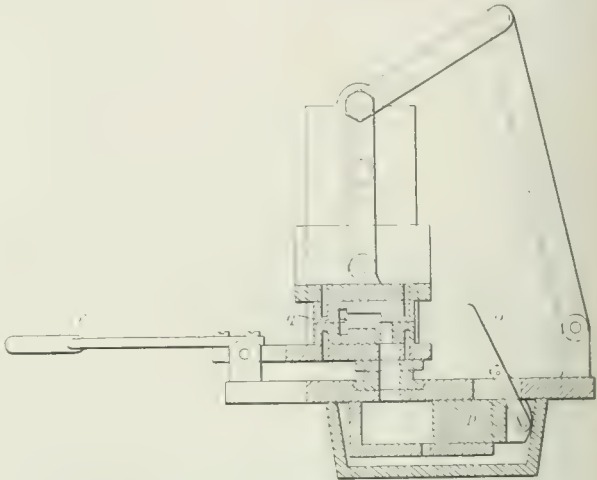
One of the Earlier Types of Die-Molded Casting Machines.
